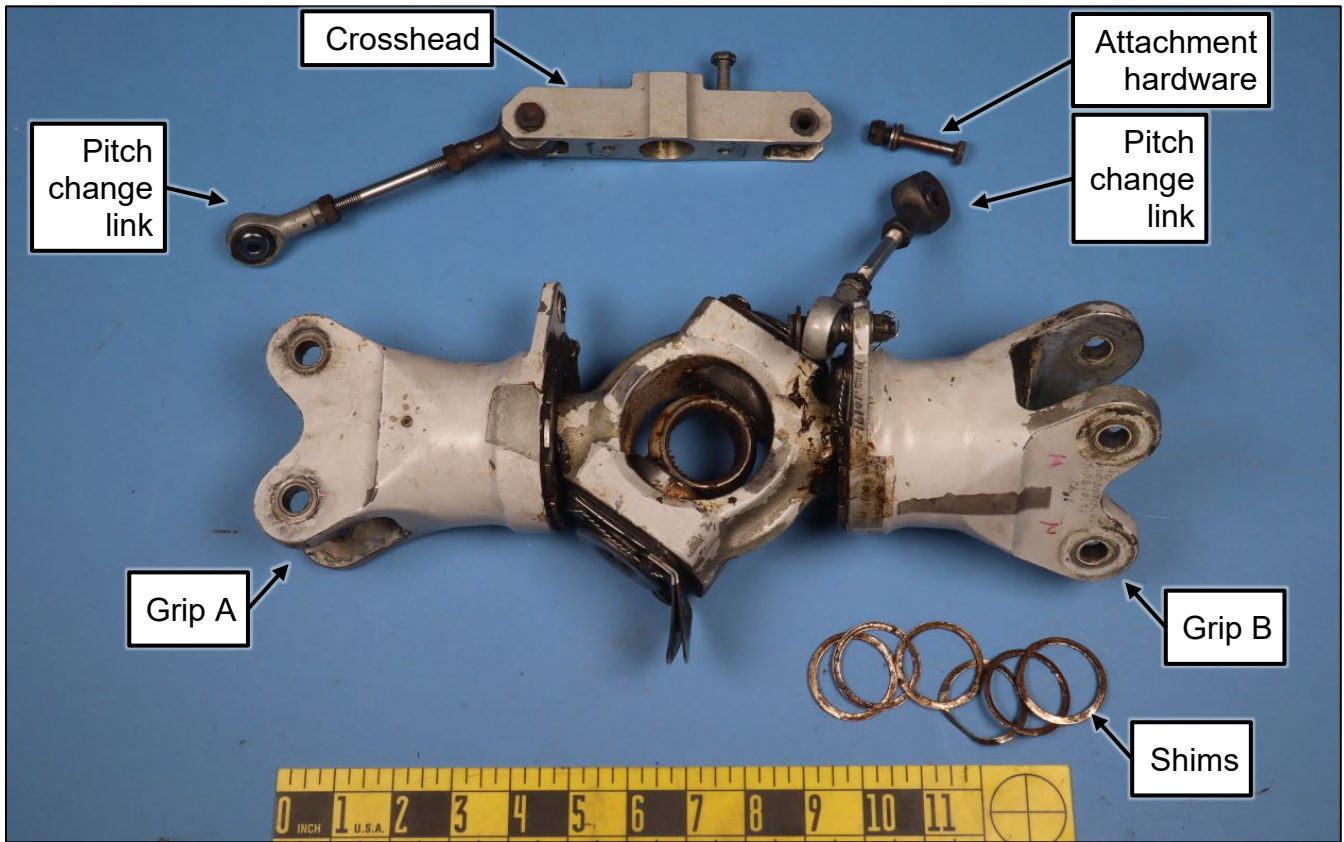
Submitted tail rotor hub assembly, pitch change links, and crosshead assembly as received.
